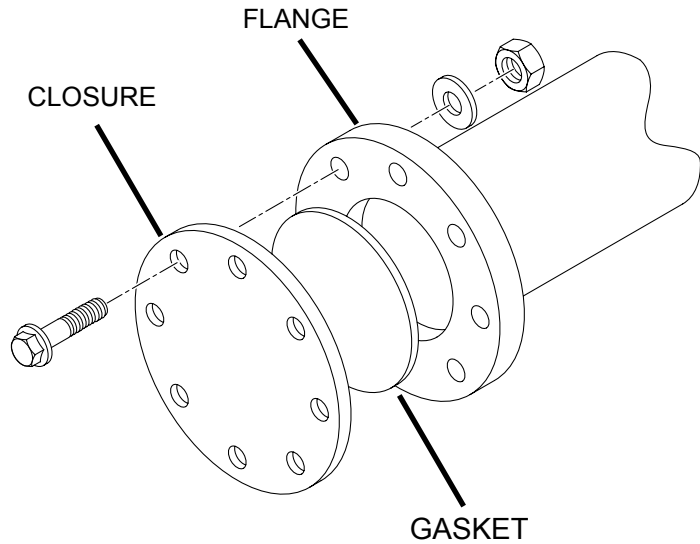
FLANGE CLOSURES (4 IN. SHOWN)
